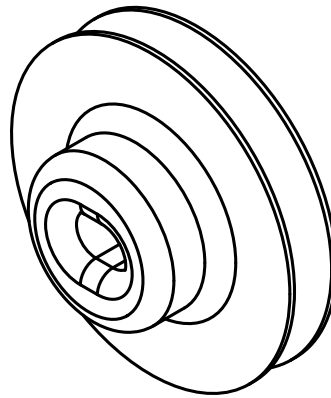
Perspective view of a wheel used on the robot. The rubber O-ring fits into the groove along the outer edge. The inner part surrounding the oval slit for mounting to the gearbox can be printed in TPU for better adhesion.
